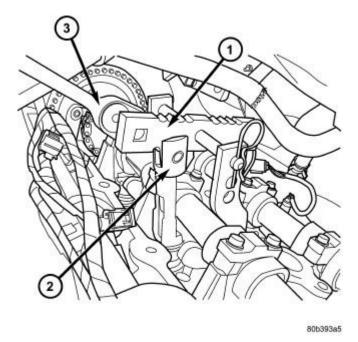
Rocker Arm - Removal/Installation Courtesy of CHRYSLER LLC
